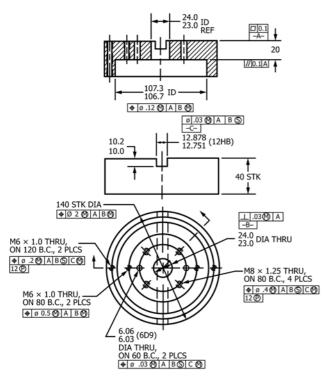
The Outer Shell of the Compression Fixture in Metric Units
